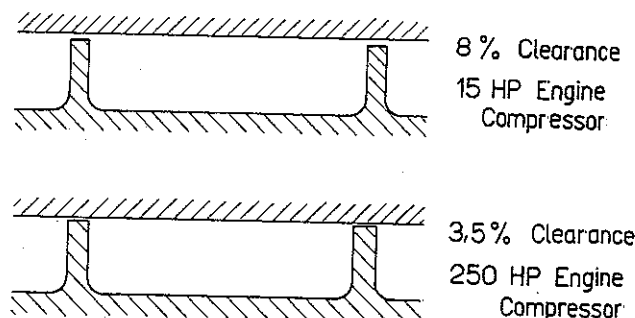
Comparison of typical relative blade tip clearances for 15 hp and 250 hp gas turbine compressor wheel of similar geometry
